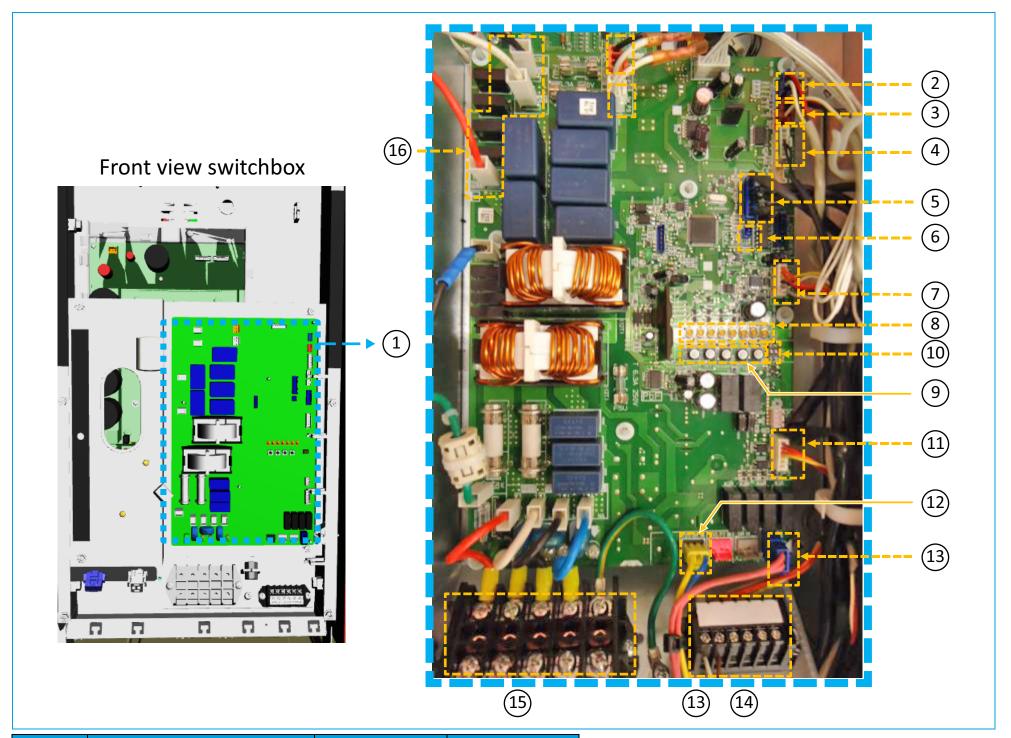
Switch box - compressor module 8 hp - inverter board
